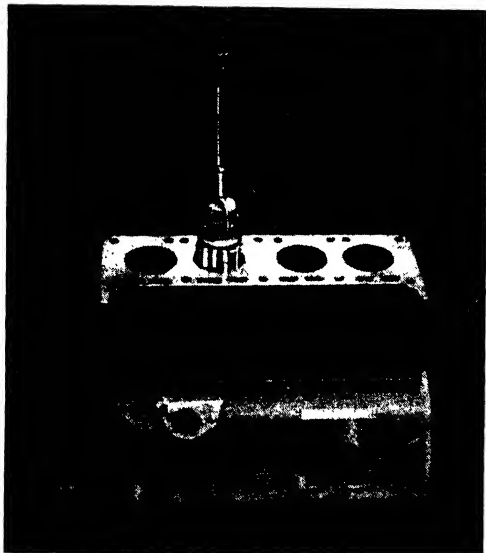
HONE IN CHUCK OF HEAVY-DUTY DRILL
